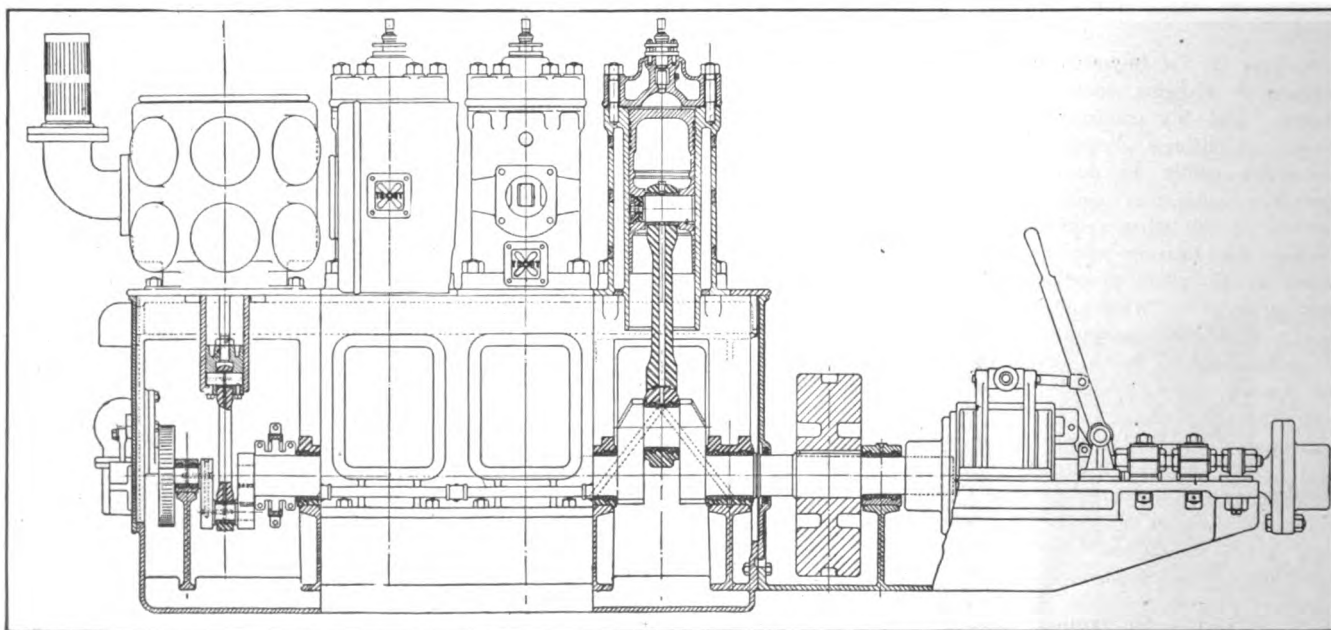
NEW MARINE DIESEL ENGINE, BUILT BY TROUT CO. IN SIZES RANGING FROM 75 BRAKE HORSEPOWER 3-CYLINDERS TO 480 BRAKE HORSEPOWER 6-CYLINDERS
